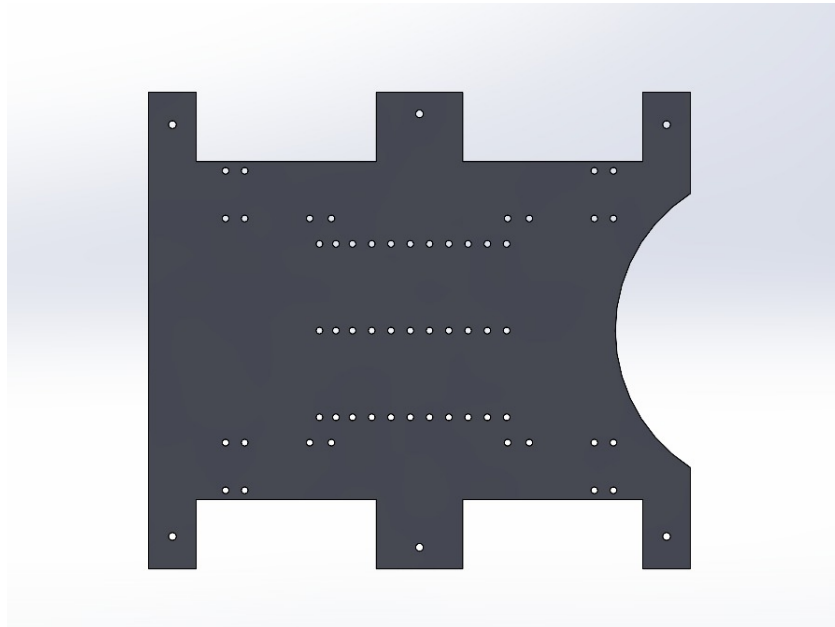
Robot's base/chassis cad model with holes defined for accurate mounting
